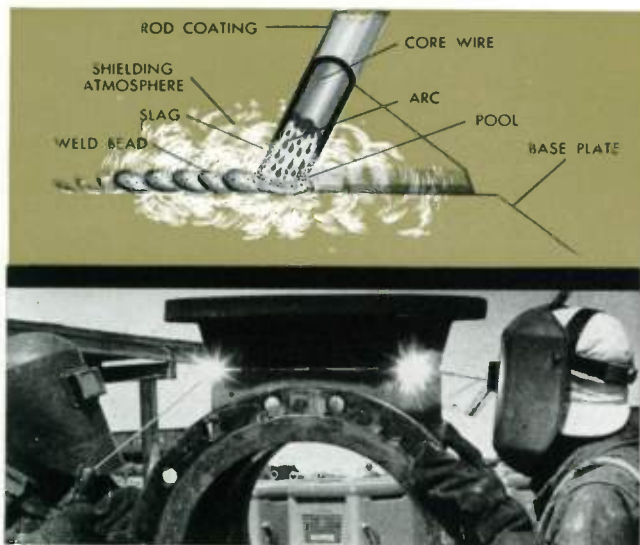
(Top) Schematic diagram of the flux-coated stick-electrode welding process. This process (bottom), using mild steel, low-alloy, and stainless steel in light, medium, and heavy gauges, can be used on all common joint types and in all positions.
